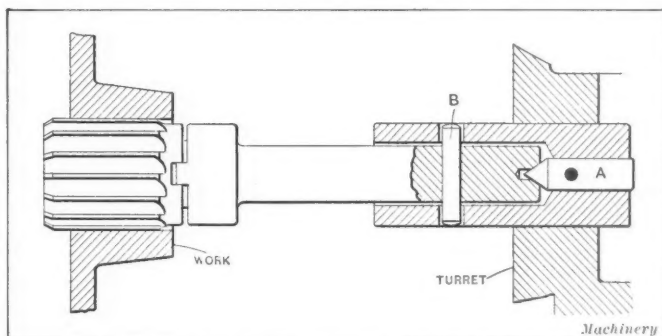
Improved Form of Holder with Plug A to center the Reamer and take the Thrust
